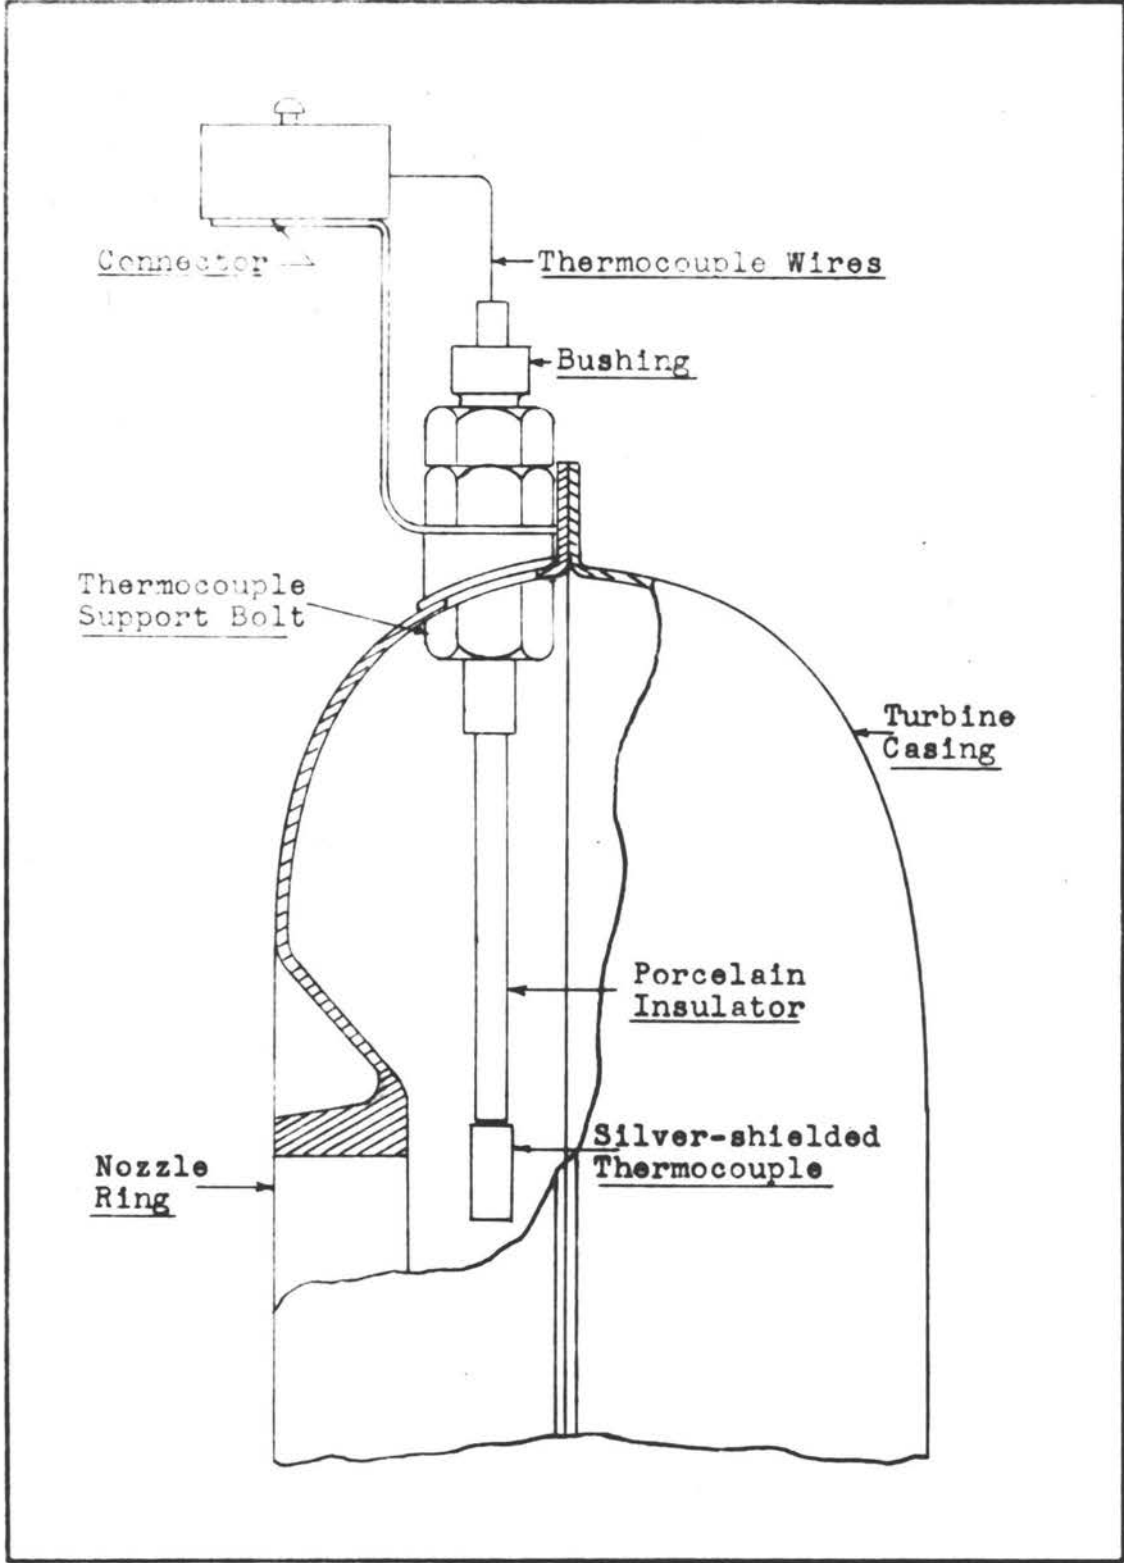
TYPICAL ASSEMBLY OF THERMOCOUPLE AND SUPPORT
